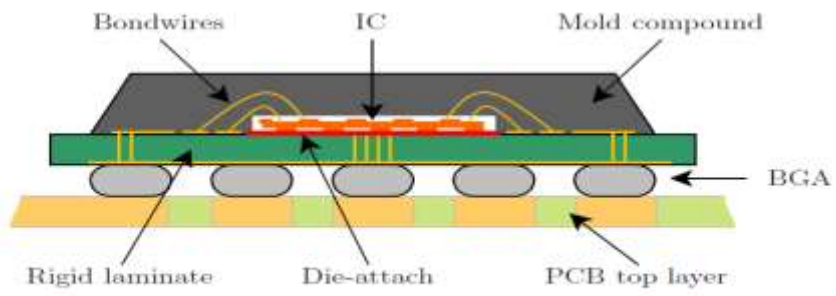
Schematic of a Ball Grid Array (BGA) package.
